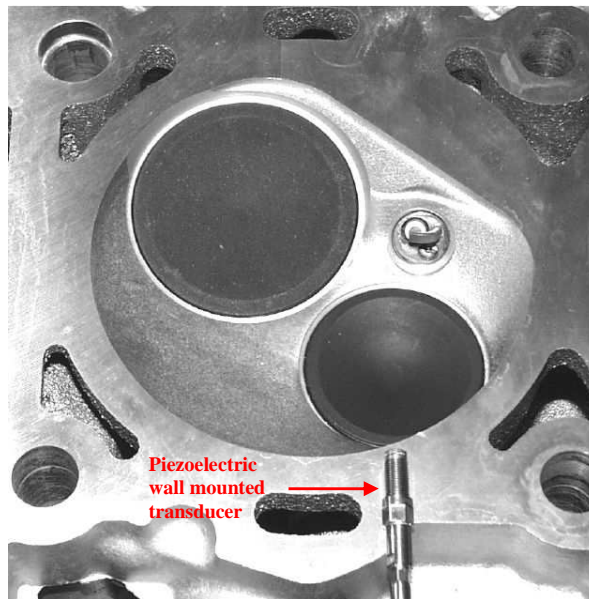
Wall mounted pressure transducer shown removed from its mounting location in the cylinder head, but directly positioned directly above it for clarity (mounting hole not visible in this picture) (Roth, Sobiesiak, Robertson & Yates 2002: pg2)
